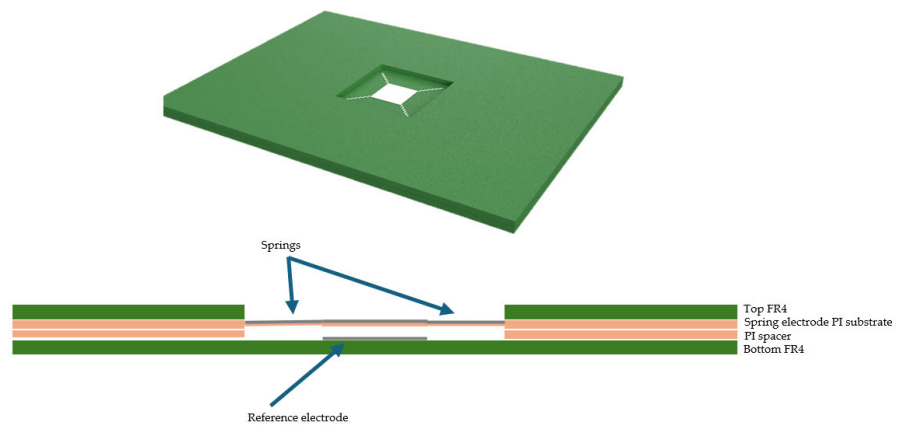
Mock-up of printed electric field sensor test setup (top) and stack-up (bottom).
